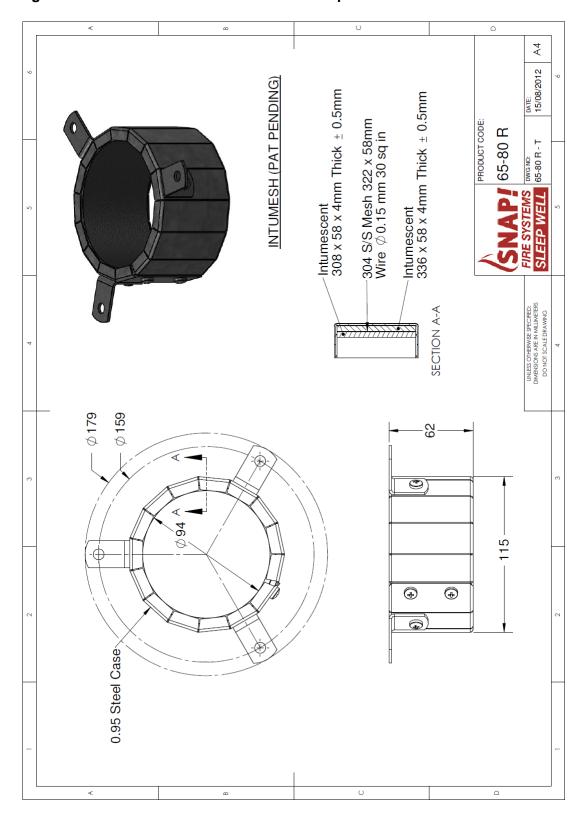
65-80 R Retro-fit Collar installed to specimen No's. 2 & 9
